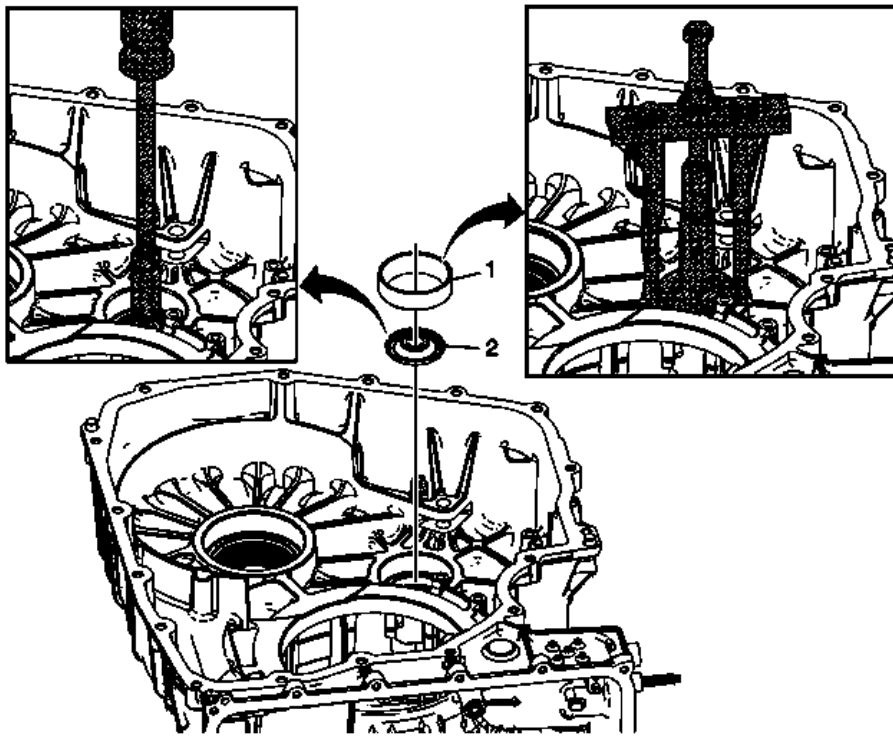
Identifying Front Differential Drive Pinion Gear Bearing Cup & Lube Dam
